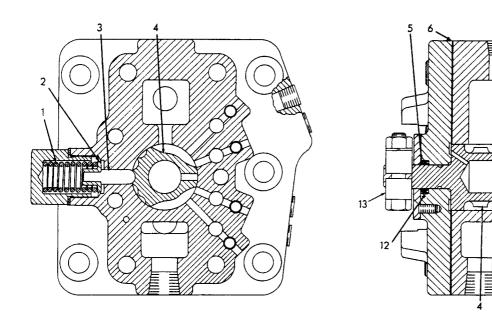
Range Selector Valve - Sectional View (T-32098)
